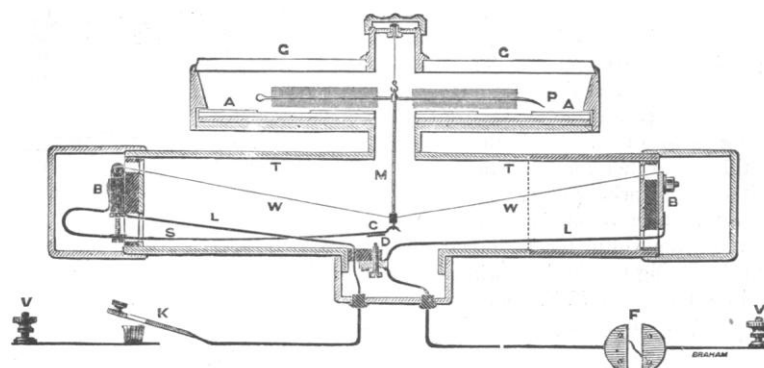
HORIZONTAL SECTION OF HOT-WIRE VOLTMETER.
